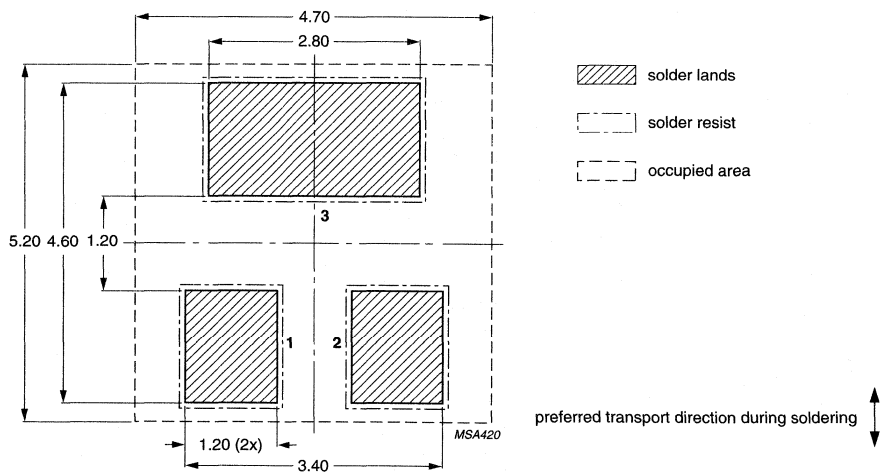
Wave soldering footprint for SOT346 (SC-59).
